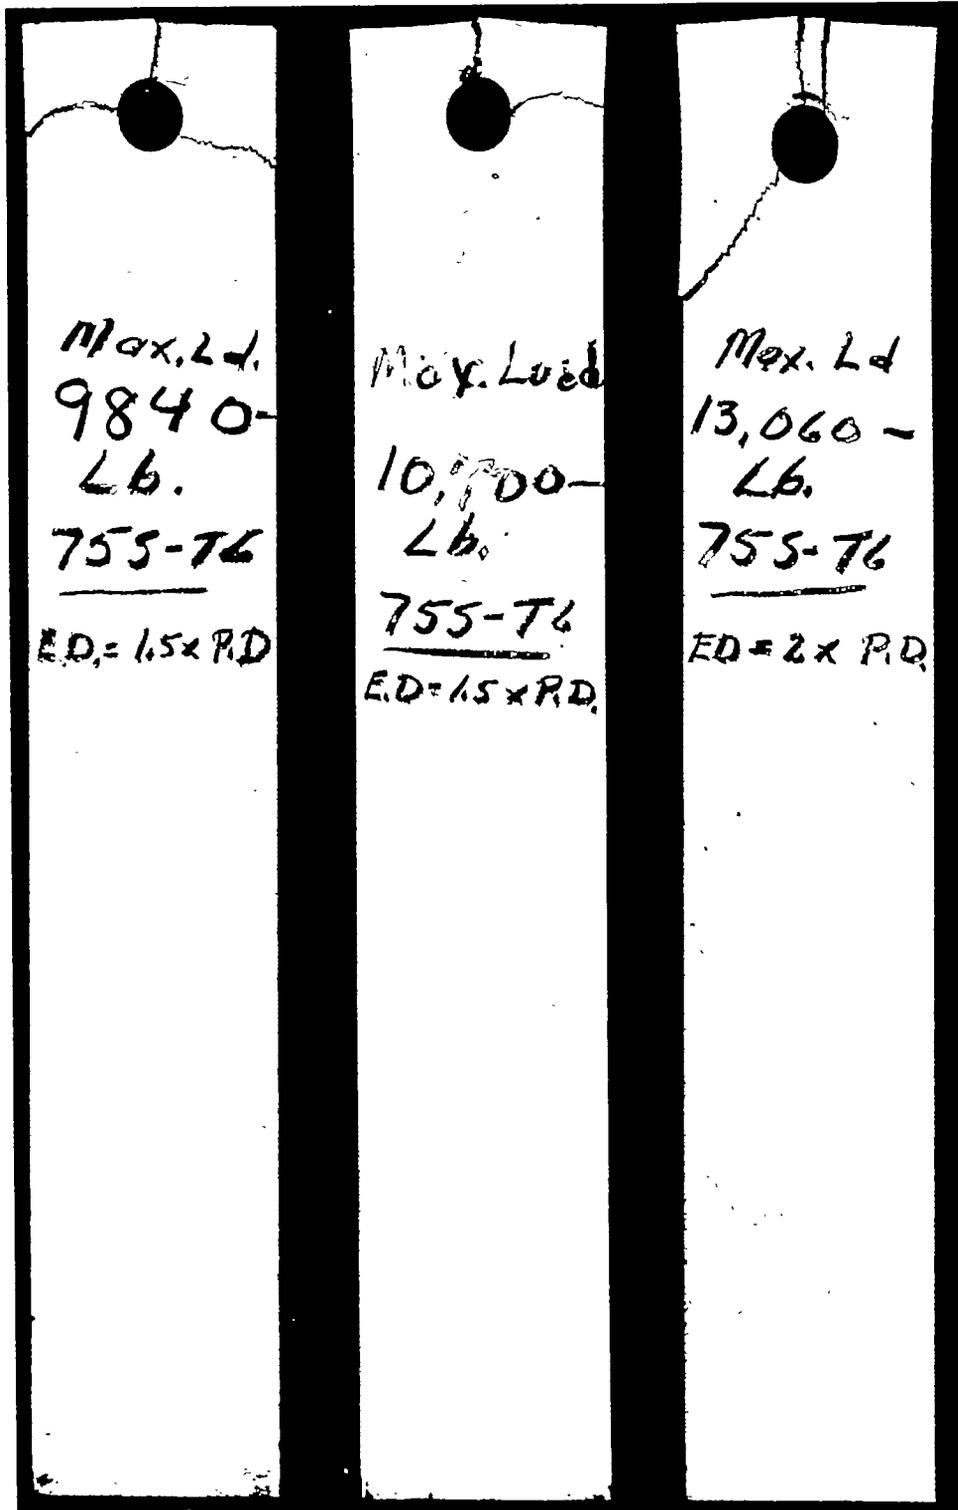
Samples of bearing test failures in 75S-T6 aluminum-alloy hand forgings.
